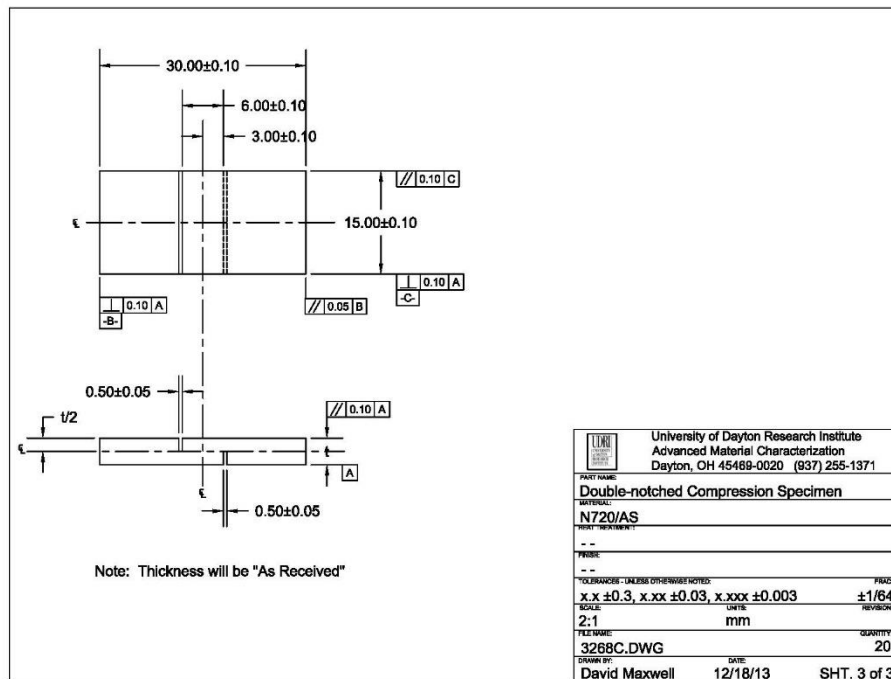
Machining Drawing For Double Notch Compression Test Specimen
